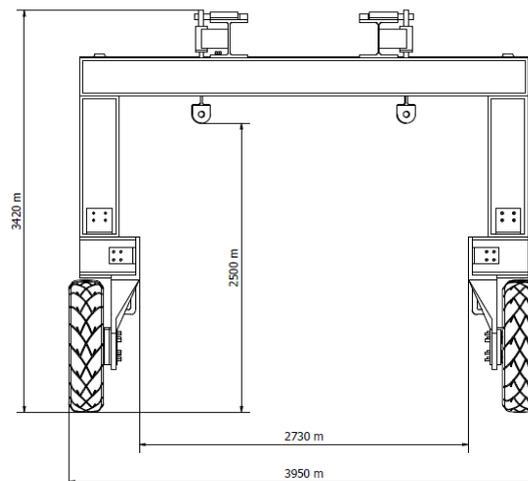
New System design front view dimensions (mm) (Mafokwane, et al., 2019).
